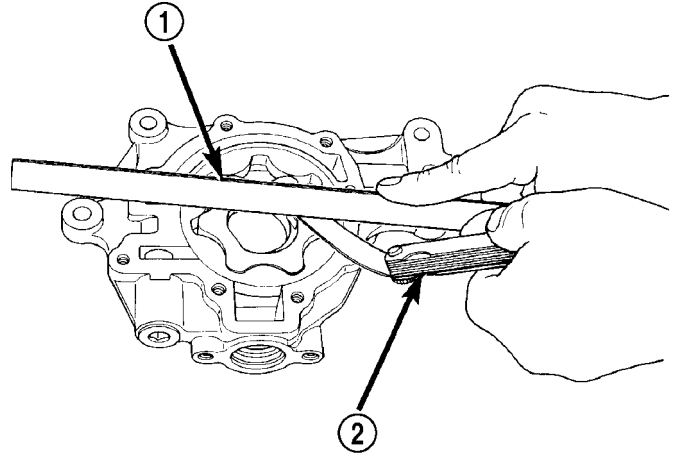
MEASURING CLEARANCE BETWEEN ROTORS
